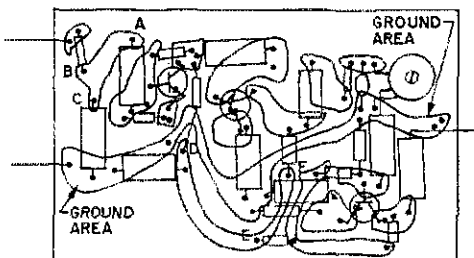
Top, or component side, of a typical circuit board. A full-size scale drawing of the component layout is transferred to the board by tracing over carbon paper. The irregularly shaped areas embrace terminals that are to be connected together. For example, in wiring up the board, terminals A, B, and C will be connected together; similarly, terminals D, E, and F will be connected together. The long narrow area weaving through the approximate center of the board includes all ground connections.
